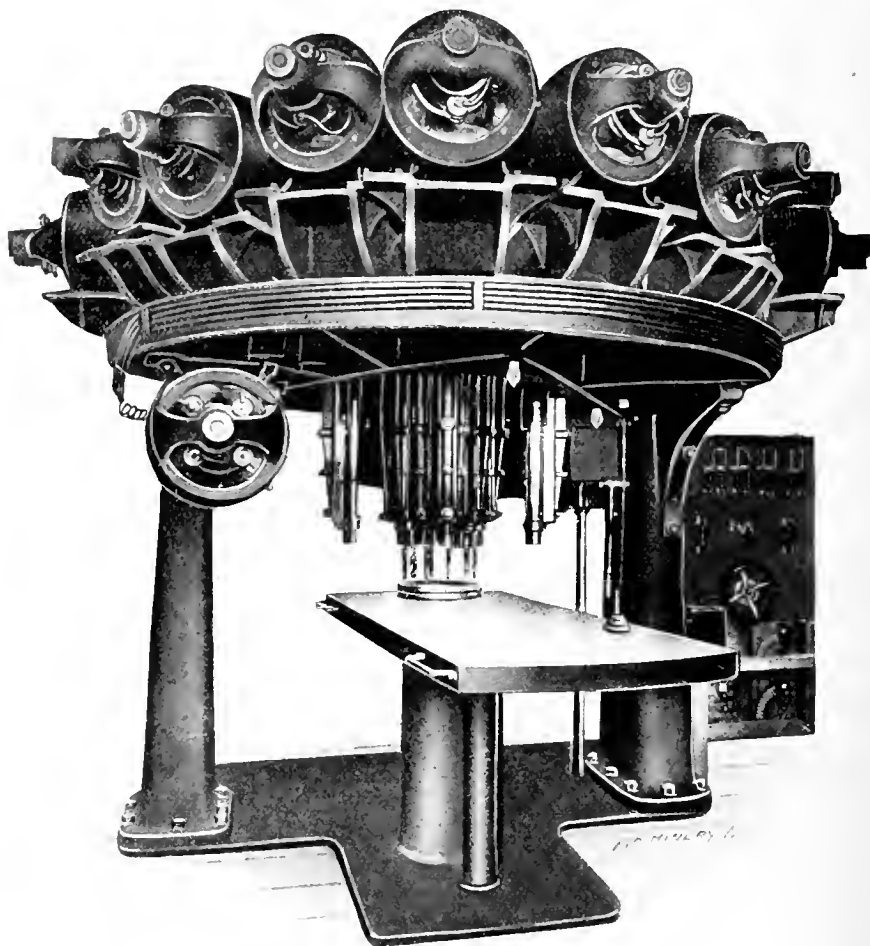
Crane 16-spindle Drill, driven by Seventeen Variable Speed Motors.
